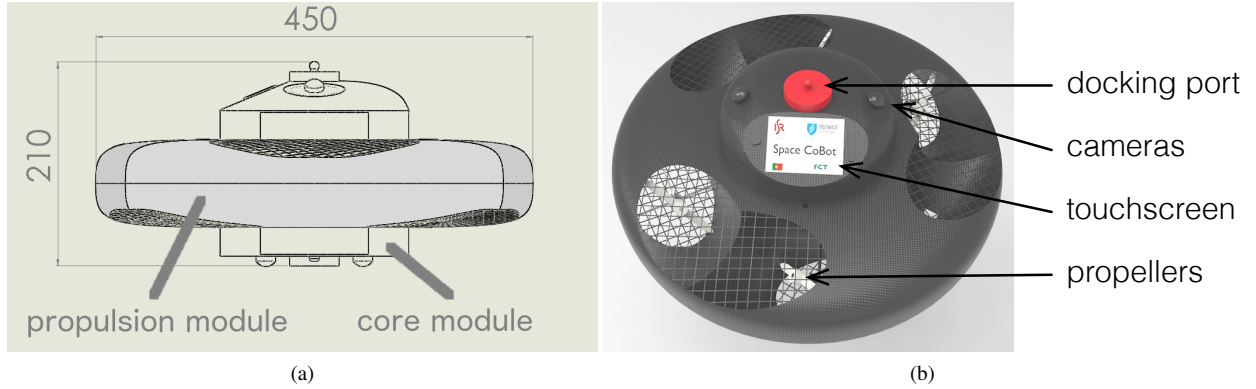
Design of the Space CoBot: (a) side view with the core and propulsion modules indicated with dimensions in millimeters; (b) CAD rendering showing some of the main components.
